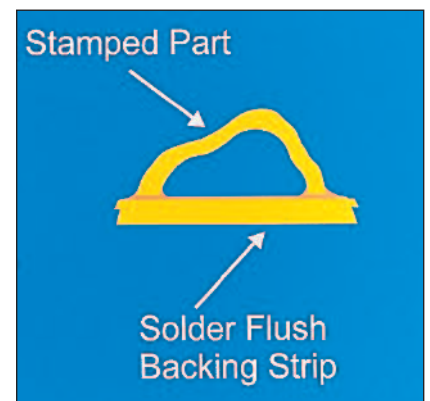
Sketch of stamped and soldered components using solder flush sheet
